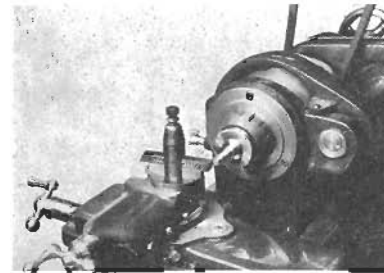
Turning a Component held in a Draw-in Collet Chuck
